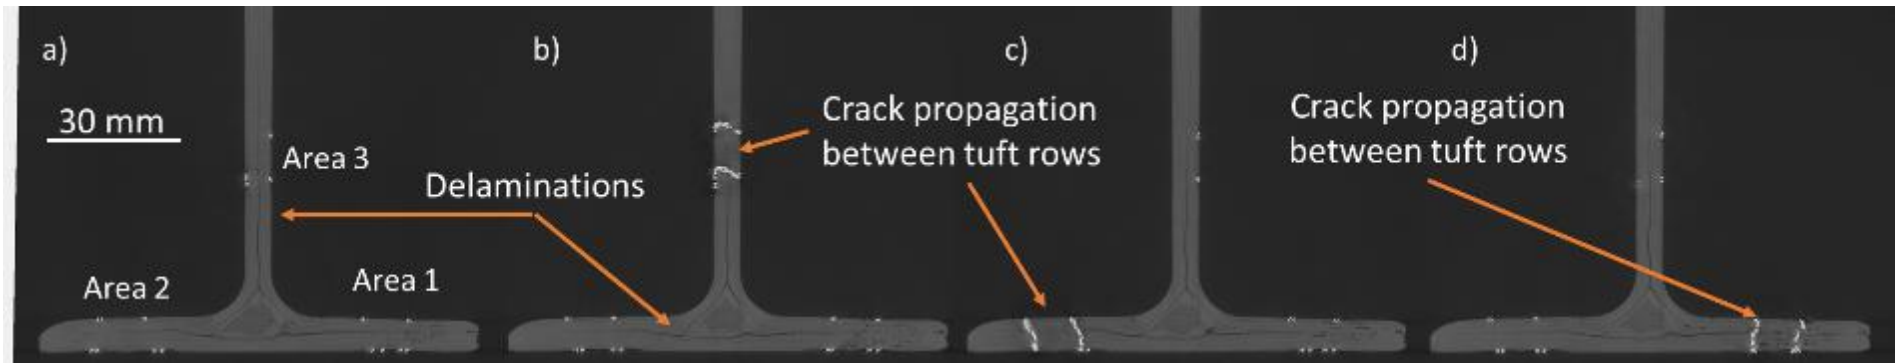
CT-scans tufted specimen - sectioned along specimen.
